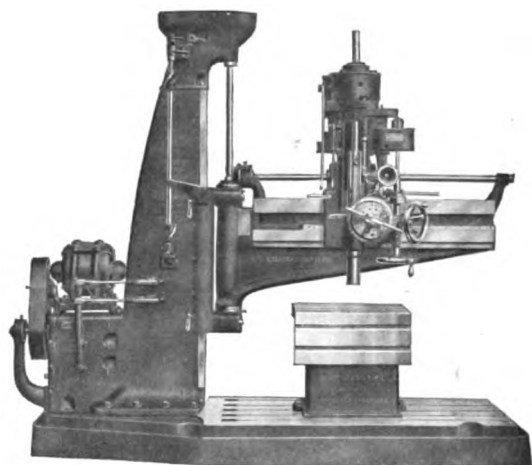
Reed-Prentice 5-Ft. Arm Standard Pattern Radial Drilling Machine
